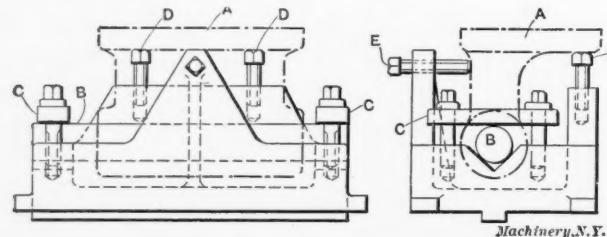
Milling Fixture in which Work is Located from a Previously Bored Hole.
